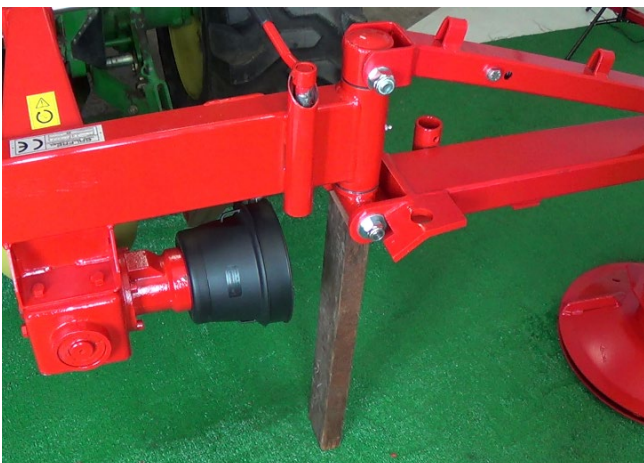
top spring arm installed with pin blocked up by using a 2x4
